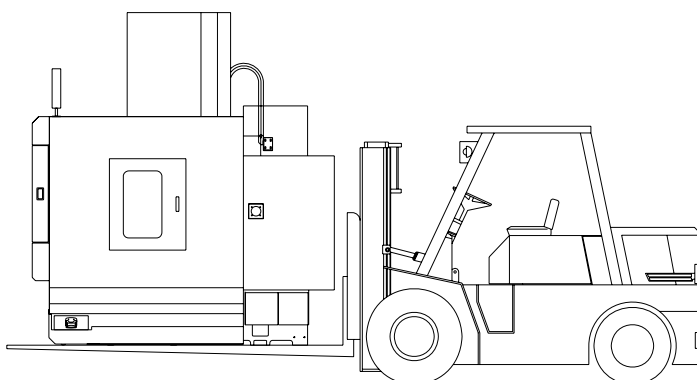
Handle the Unpackaged Machine by a Forklift
